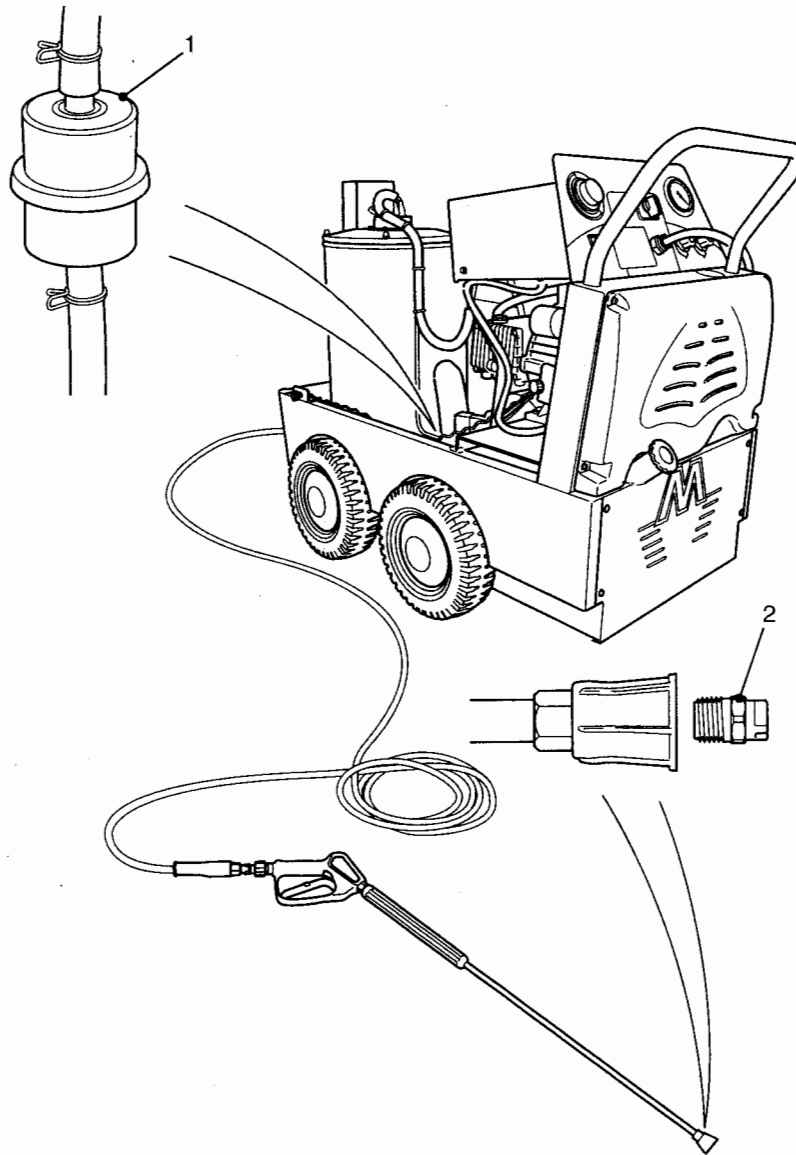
Cleaner, steam pressure jet - fuel filter and nozzle
